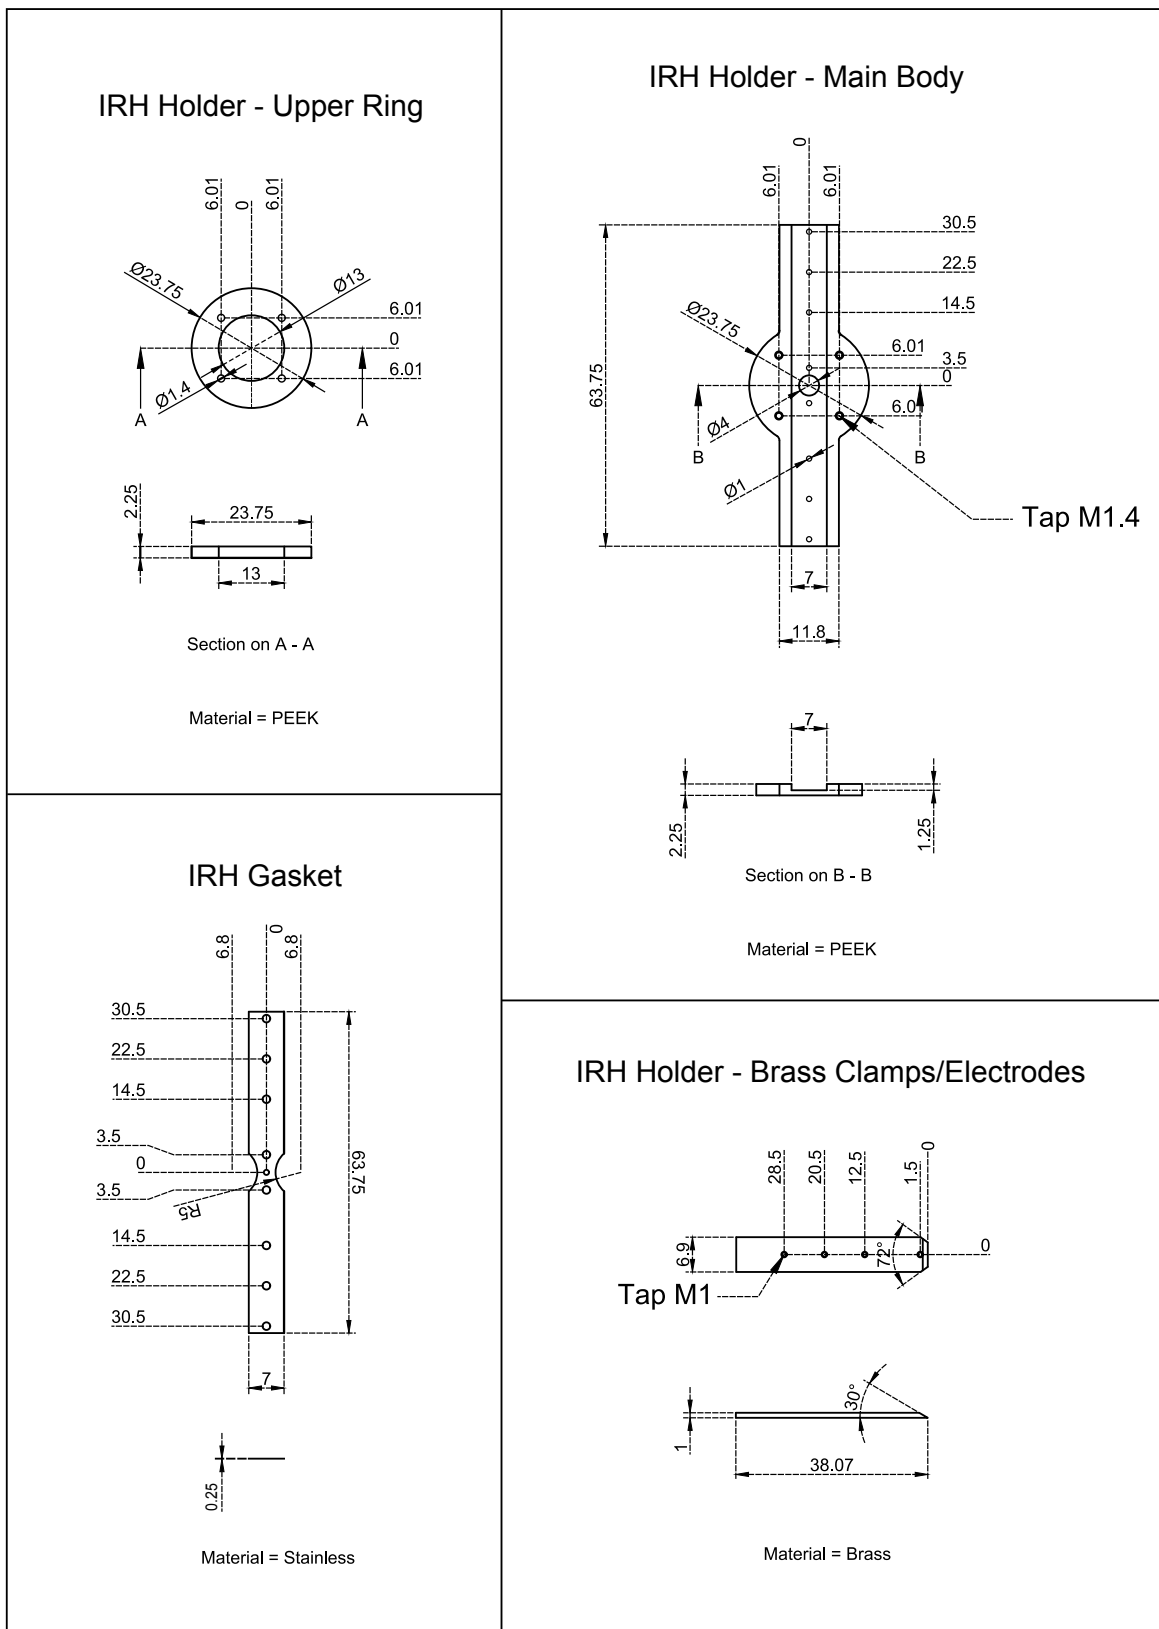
Technical drawings of the IRH gasket and gasket holder. All units are in mm. The gaskets are cut using laser machining methods, while all other components are machined conventionally. Slightly countersunk, low profile screws were used for the two M1 screws nearest the anvils so that they do not touch the diamonds as the cell is compressed.
